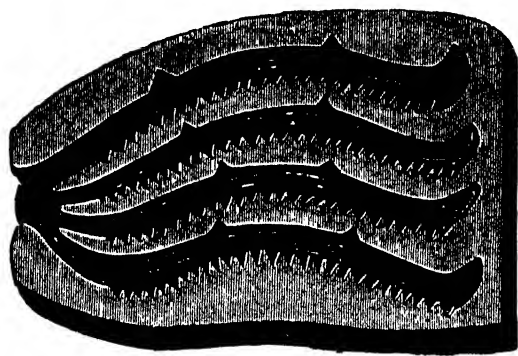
BIVALVE STONE MOLD FOR CASTING SAWS, FROM VIDTSKÖFLE, SCANIA.
